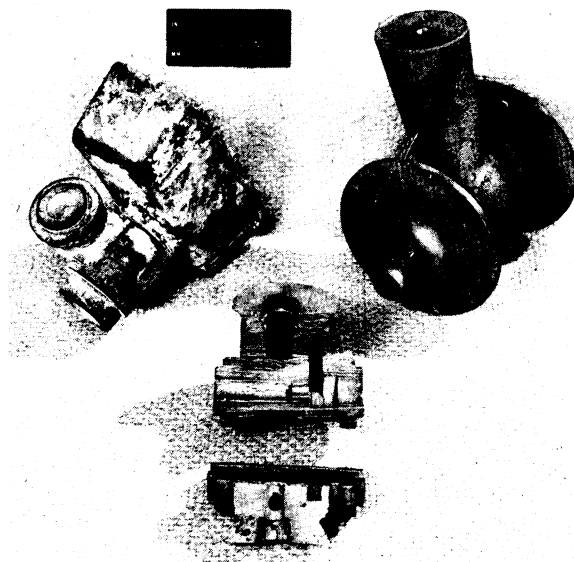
Titanium castings from frozen mercury molds provided by Alloy Precision Casting Co.
